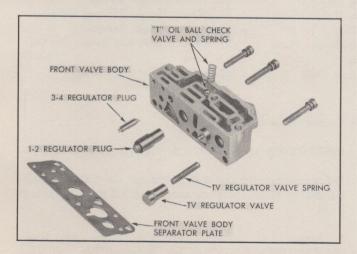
Regulator Plugs, TV Regulator Valve and Spring
